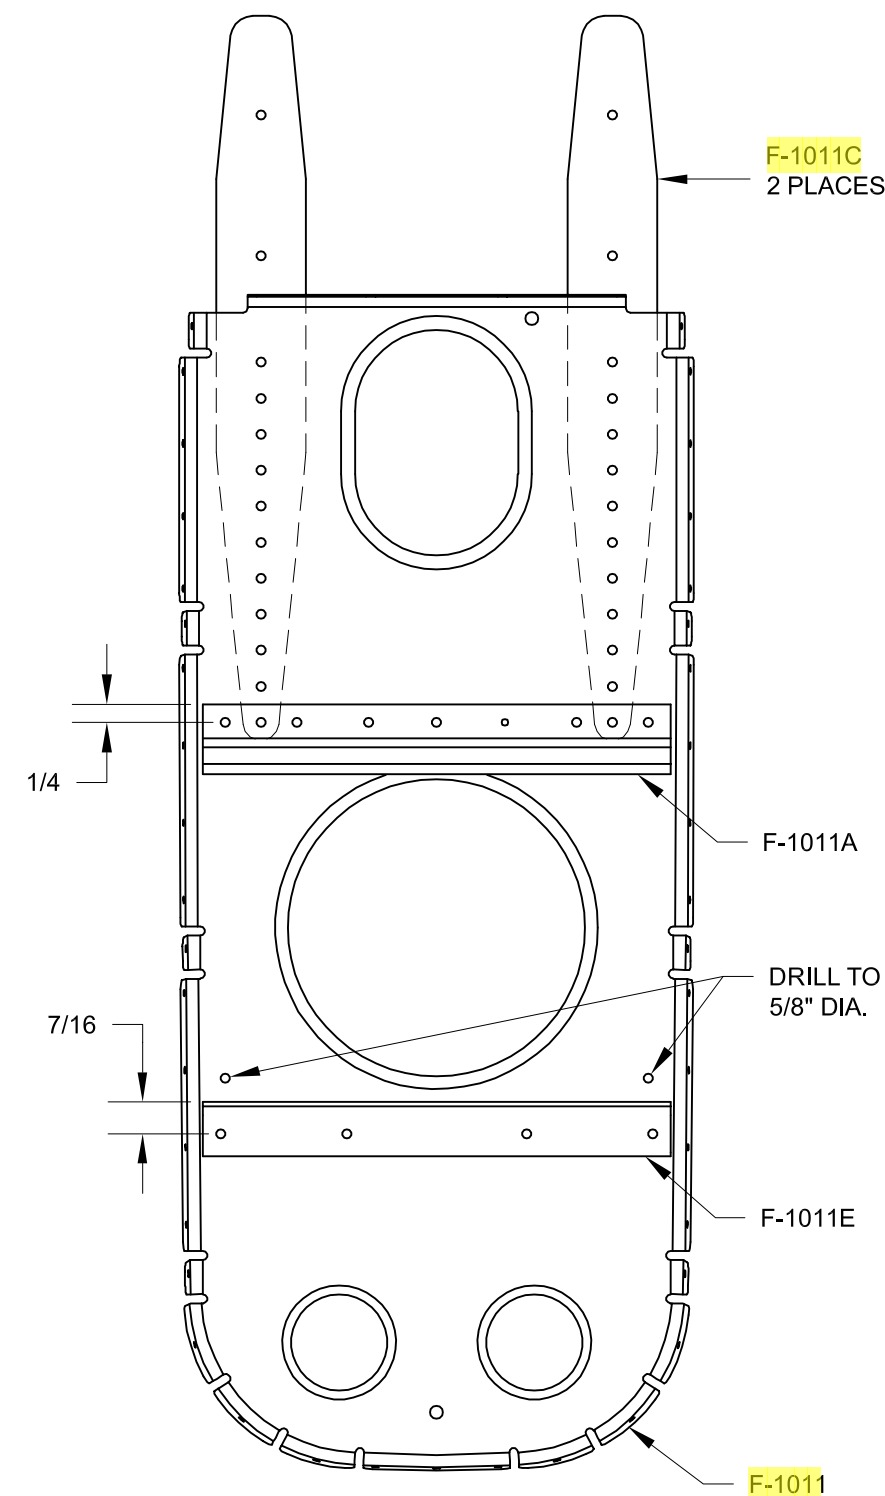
POSITIONING F-1011 BULKHEAD PARTS
